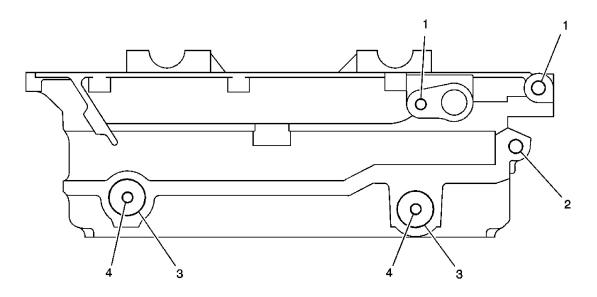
Cylinder Head - End - Front View Courtesy of GENERAL MOTORS CORP.
